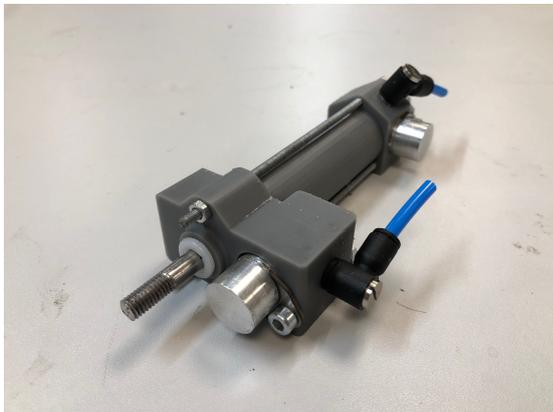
Manufactured 3D-printed cylinder ready for testing.
